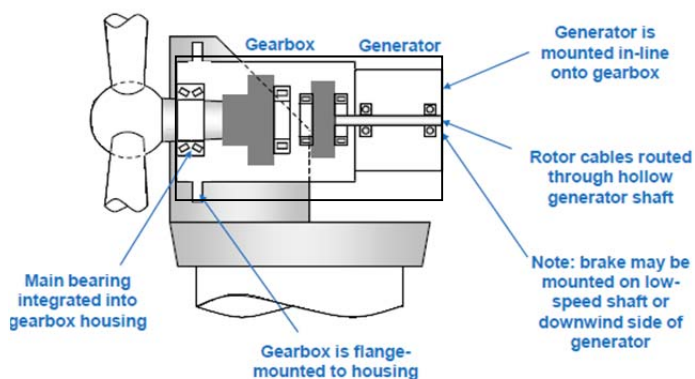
Mechanical layout of a typical high-speed geared drive-train[93]
